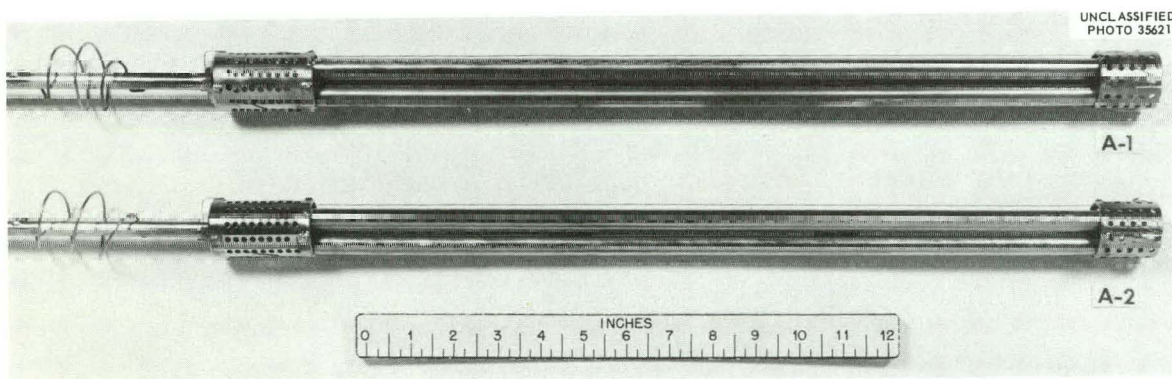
NS "Savannah" Fuel Test Specimens (Swaged) Assembly.
